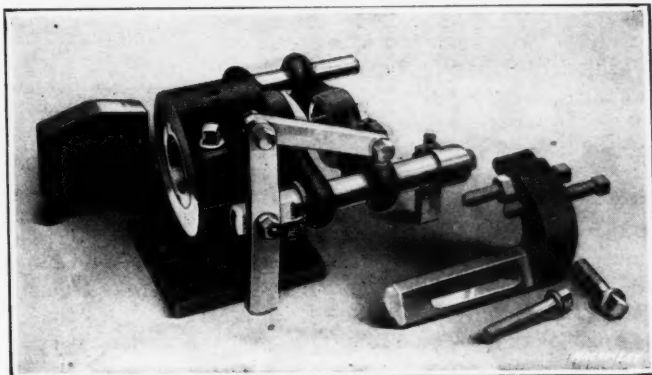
Details of Automatic Die Fixture shown in Fig. 27
